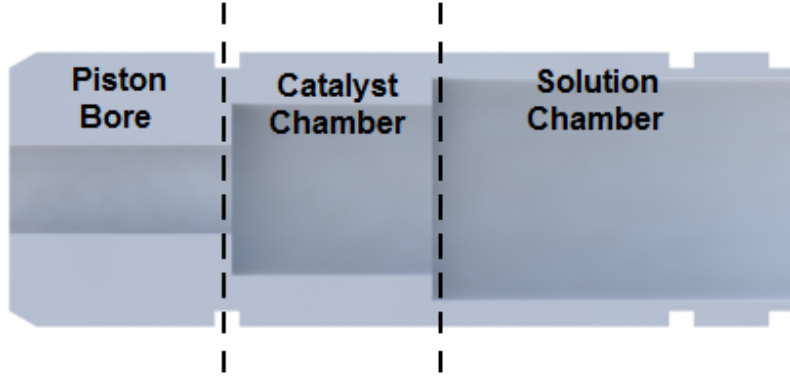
Cross-sectional view of the main body, defining the piston bore, catalyst chamber, and solution chamber.
